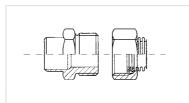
Screw coupling male part with ISO welding end or connecting piece: Precision socket type for cutting ring
